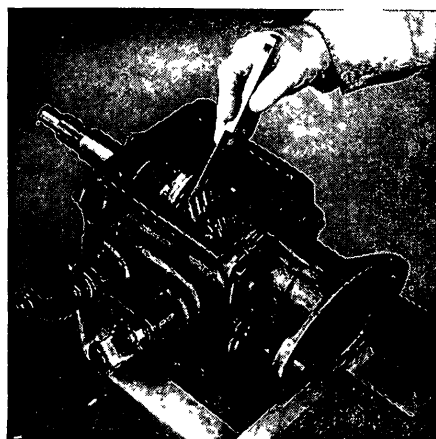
Measuring clearance between synchronizer and second speed gear. 1946-52 Series 40
